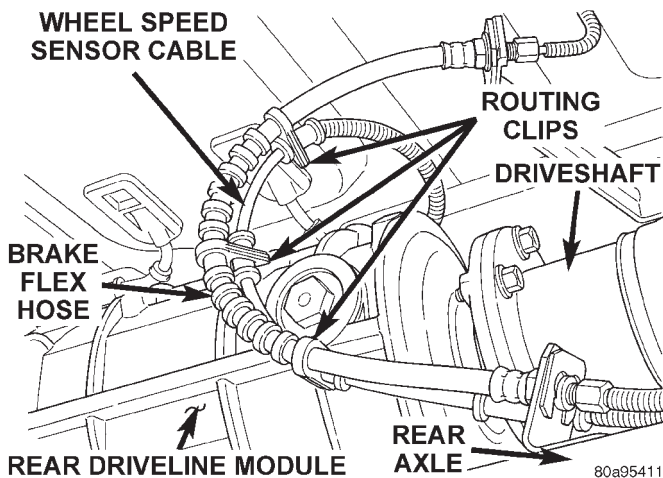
Speed Sensor Cable Attachment To Brake Flex Hose
